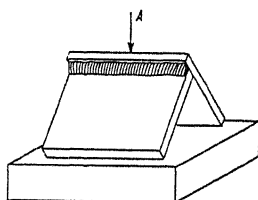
Method of rupturing fillet-weld-break specimen K.
